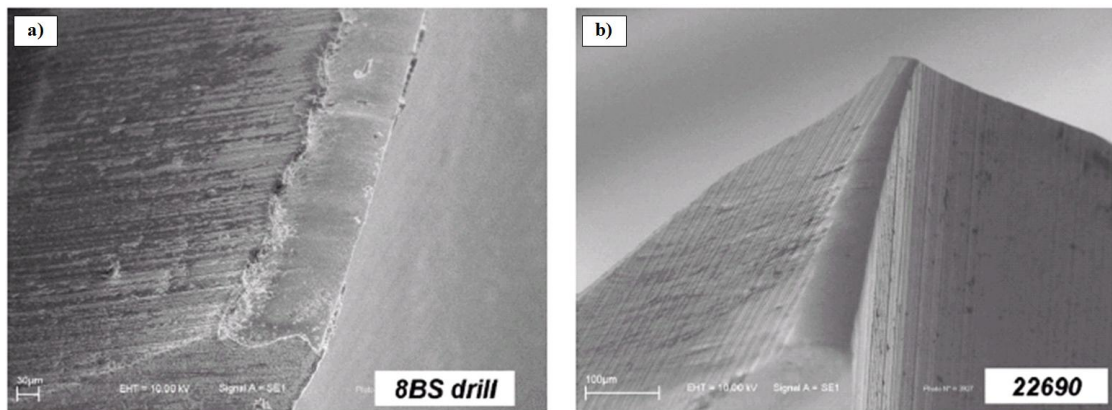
(a) A uniformly distributed wear along the cutting edge on the flank face of a diamond coated solid carbide drill and (b) rounding of the cutting edge of an uncoated solid carbide drill result from drilling CFRPs [99]
